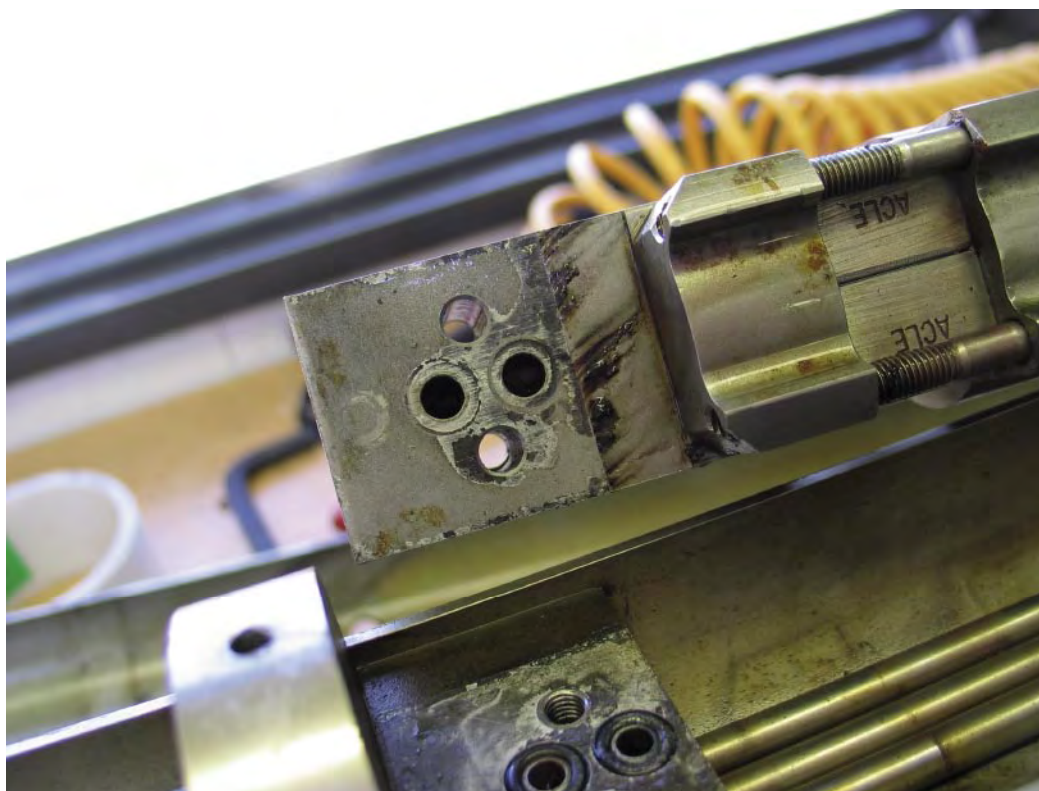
Pitting corrosion on the outside of the chemical analysing equipment.
